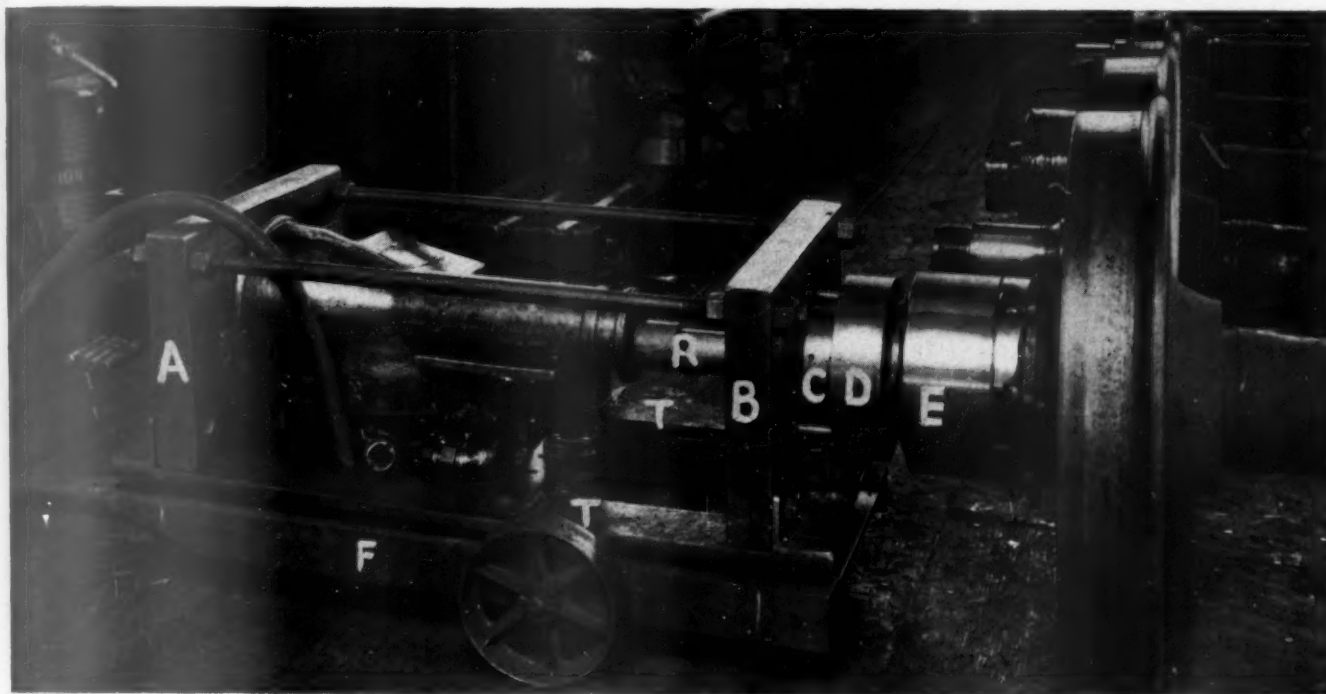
Roller-bearing puller, set up to remove the Timken taper sleeve which releases the outer cone and the double cup
